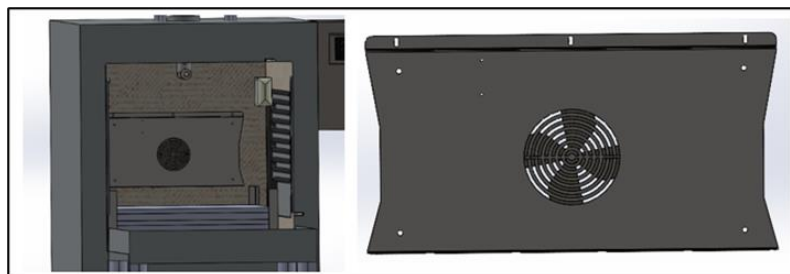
Arrangement of the Exhaust Fan Unit Installed in the Machine
